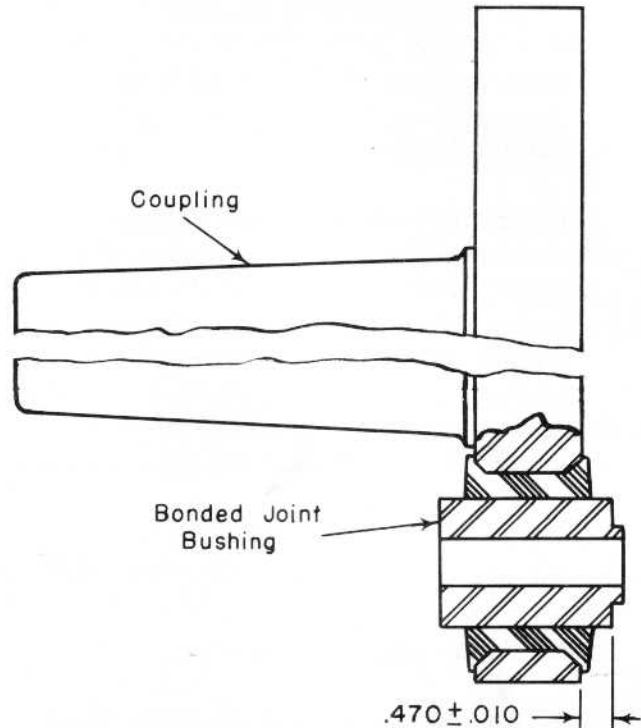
Application Dimension Bonded Joint Bushing To Coupling
